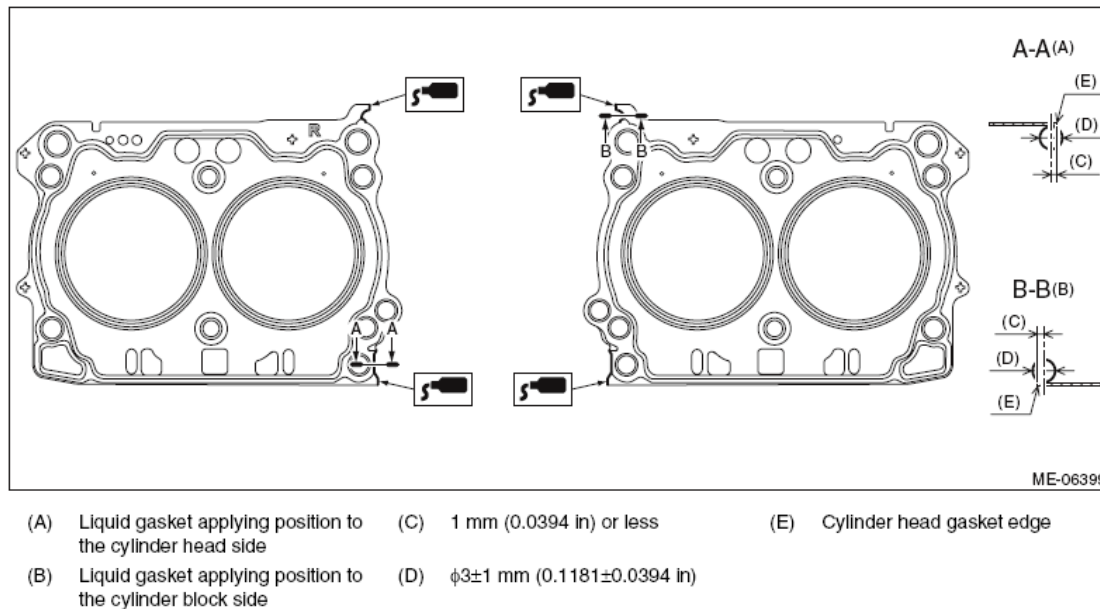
Identifying Cylinder Head Liquid Gasket Applying Area
